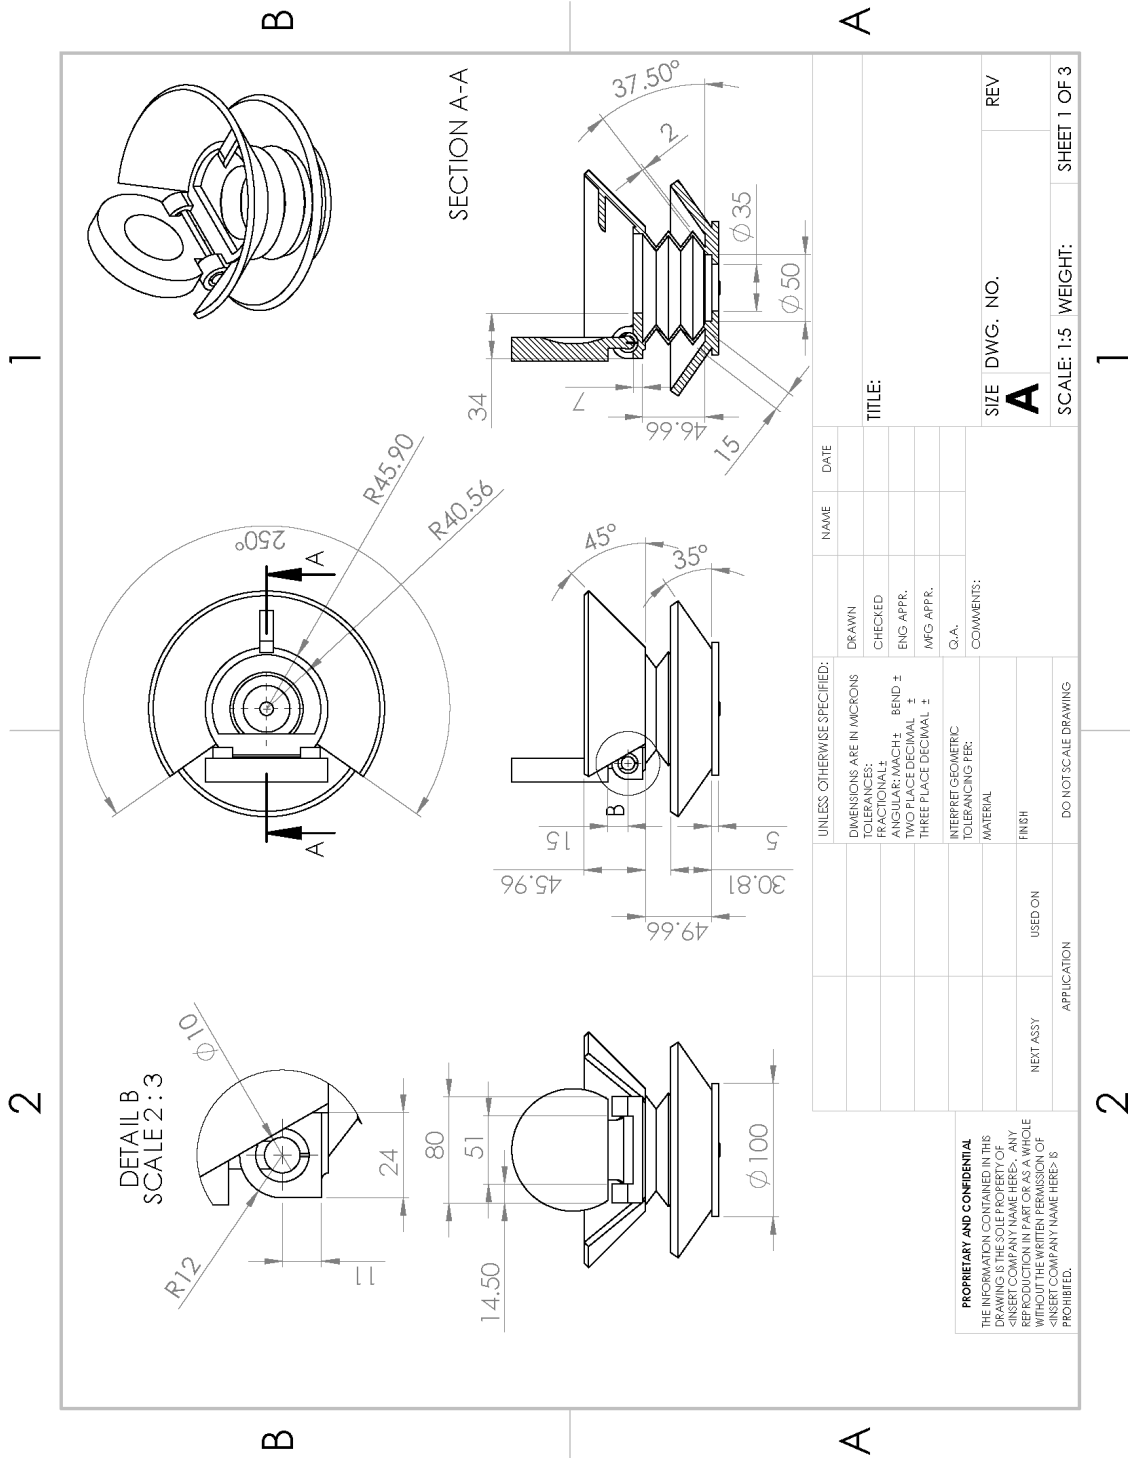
Technical drawing of the spring-body pressure sensor, page 1.
